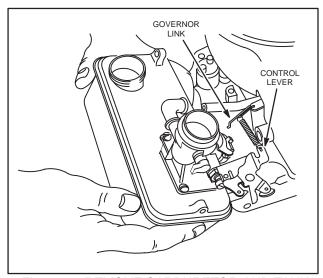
REMOVE CARBURETOR AND TANK ASSEMBLY
